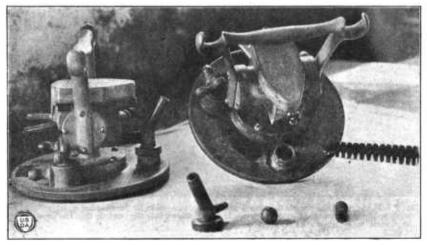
The moisture trap or check valve on the head of the machine (cover of pail) should be cleaned every day.
